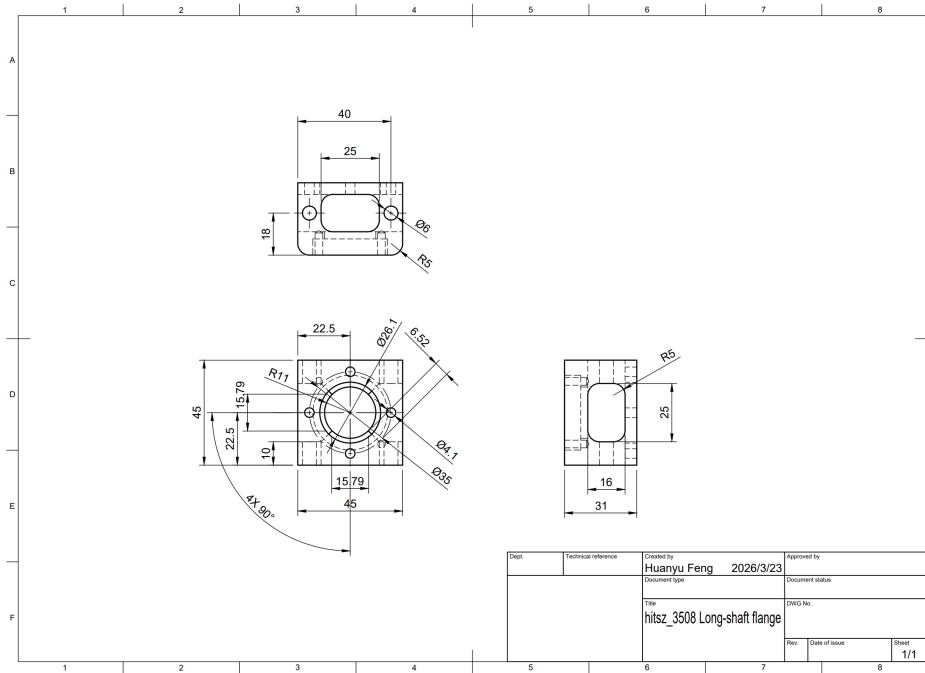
Engineering drawing of the M3508 long-shaft flange.
